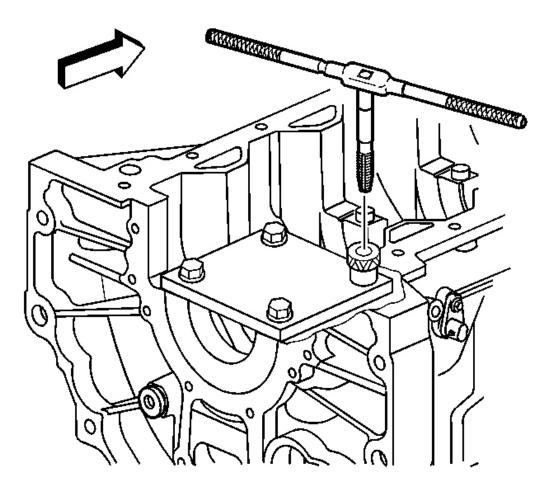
Tapping Out Threads Of Crankshaft Main Bolt Hole Courtesy of GENERAL MOTORS CORP.
